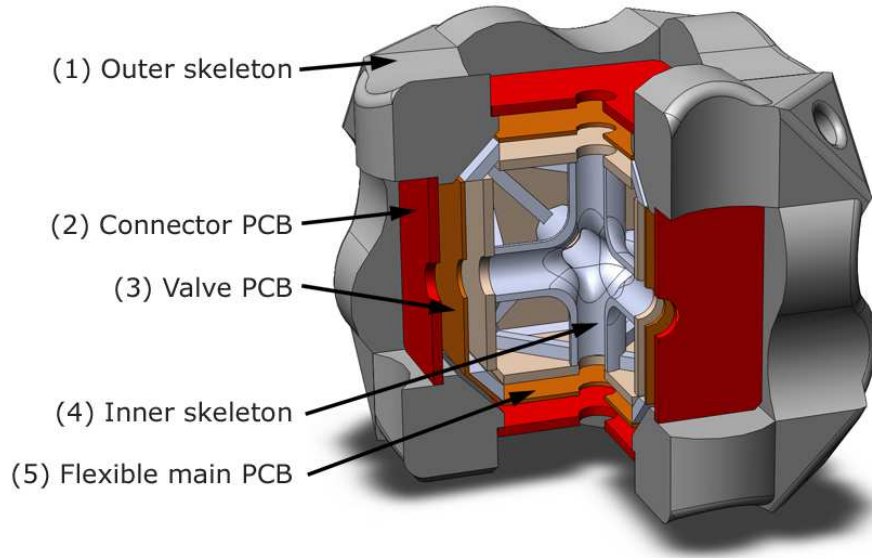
Illustration of general design of module for stochastic fluidic assembly system. The cutout makes visible the interior of the module with three layers of PCB as well as interior channels.
